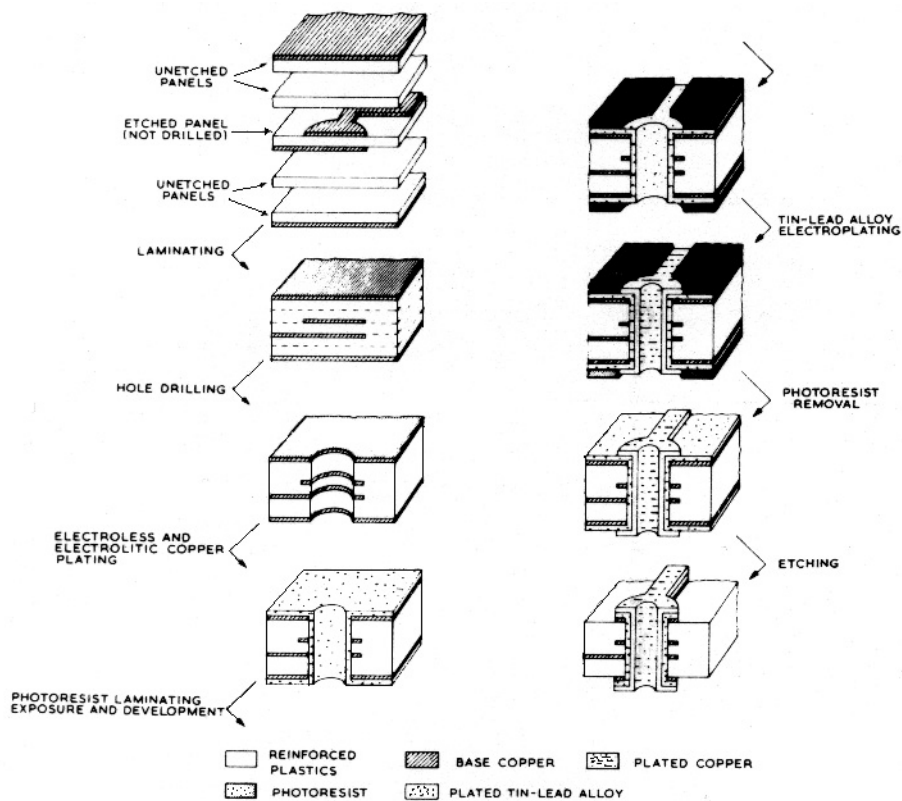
Process steps for multilayer printed wiring boards with holes only through the board.
